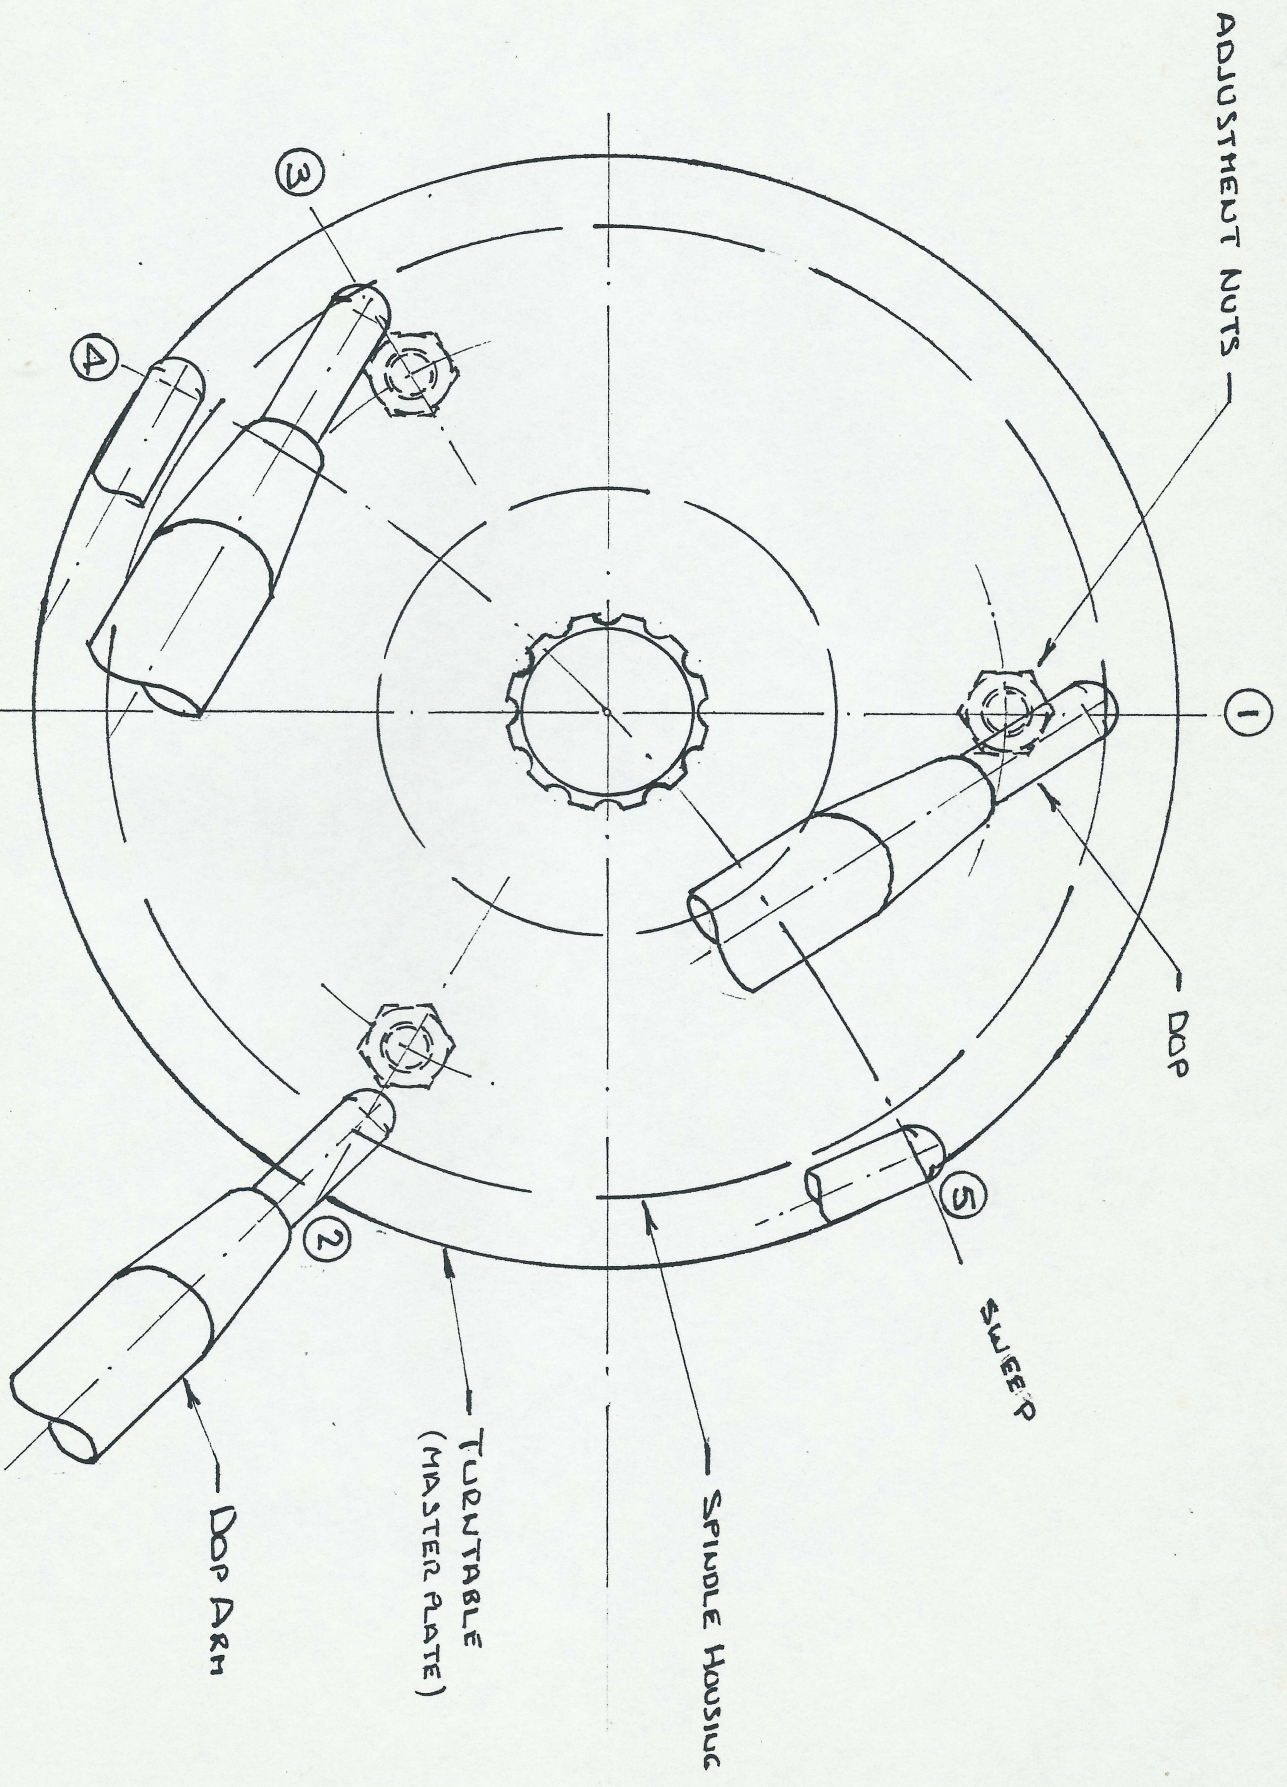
DOP ARM SPINDLE ASSEMBLY
